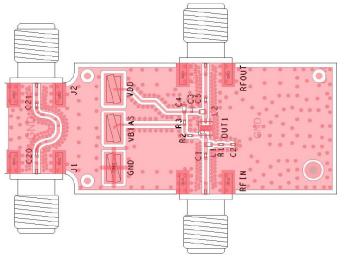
EV1HMC8413LP2F Assembly Drawing (J1 and J2 are Not Installed)
